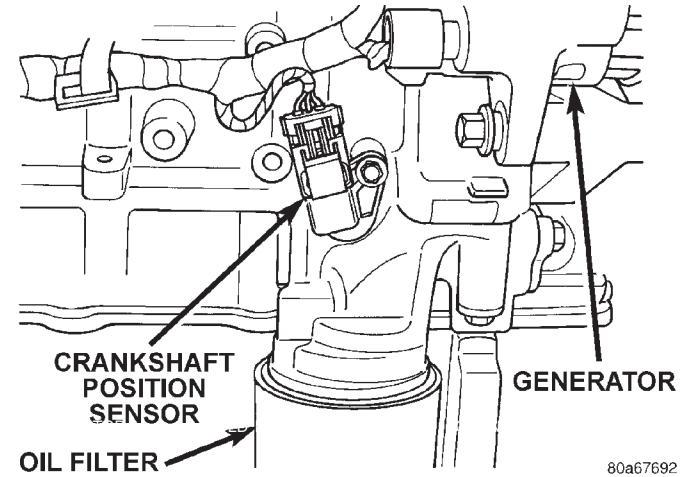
Crankshaft Position Sensor—2.4L Engines—Typical
